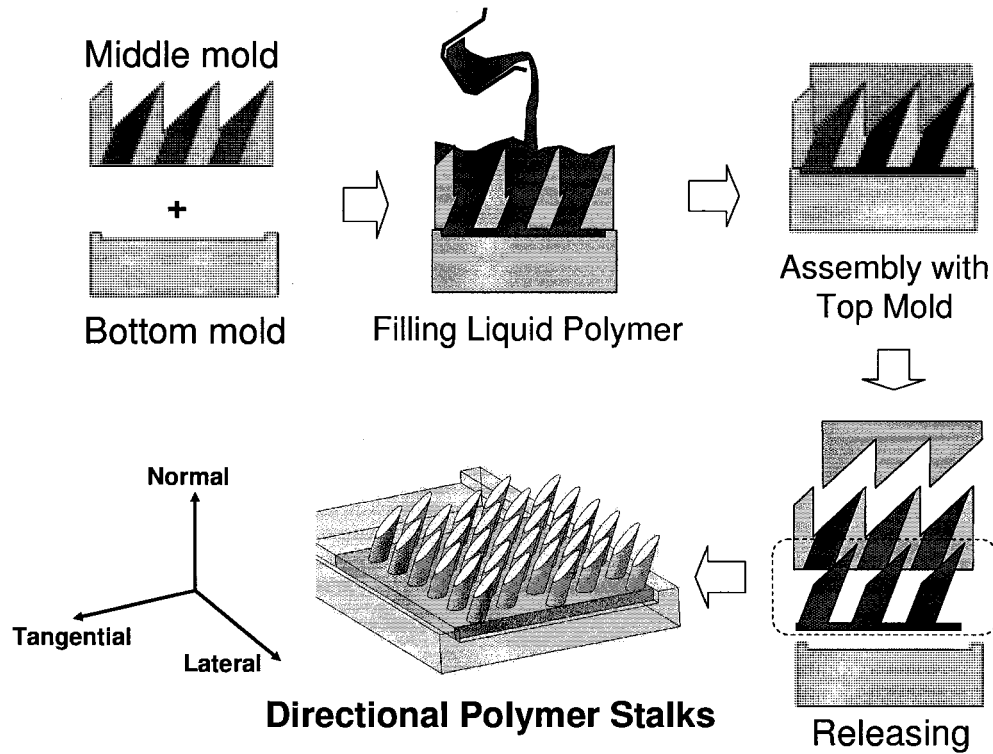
Manufacturing process of the DPS. Liquid polyurethane is poured into a three part mold. Once the polymer cures, the mold is disassembled, releasing patches of DPS.
